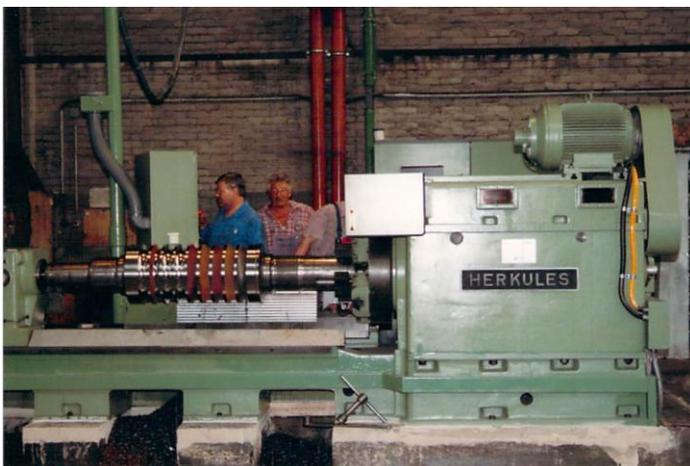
This roll lathe Hercules is very robust built. We had in the Z-axis 80 mm ball screws installed because extremely high forces arise when four steels are simultaneously engaged.
